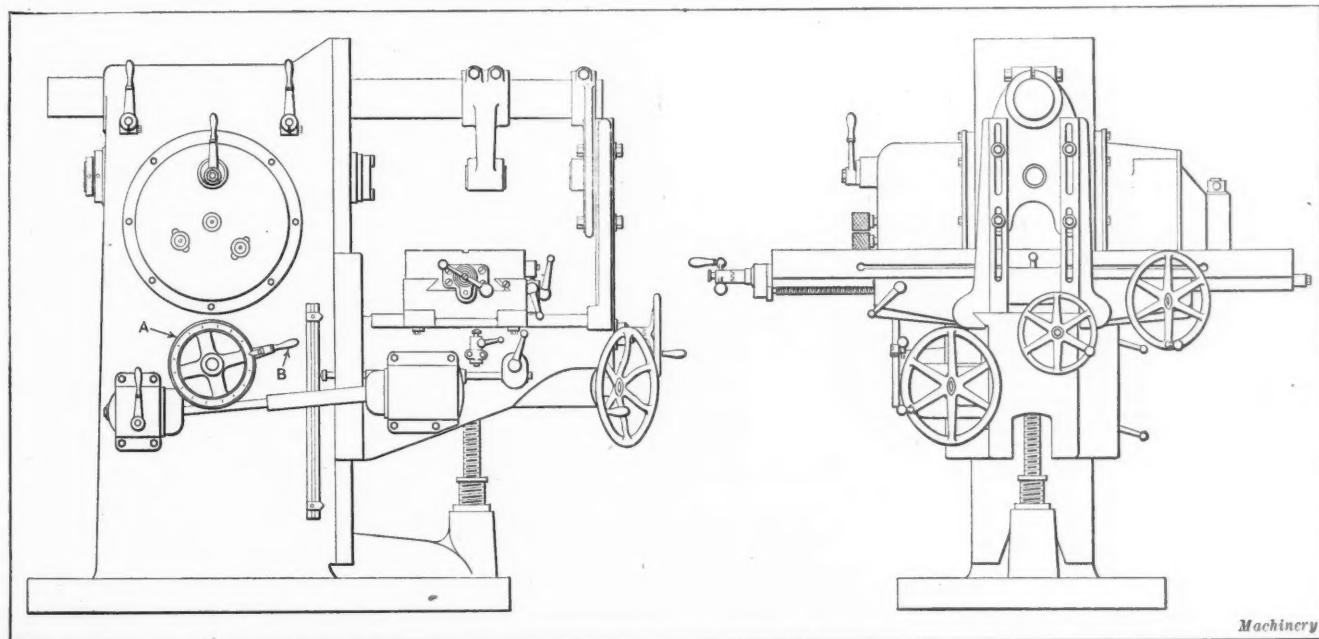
Side and Front Views of Conradson No. 3 Plain Milling Machine shown in Fig. 1
